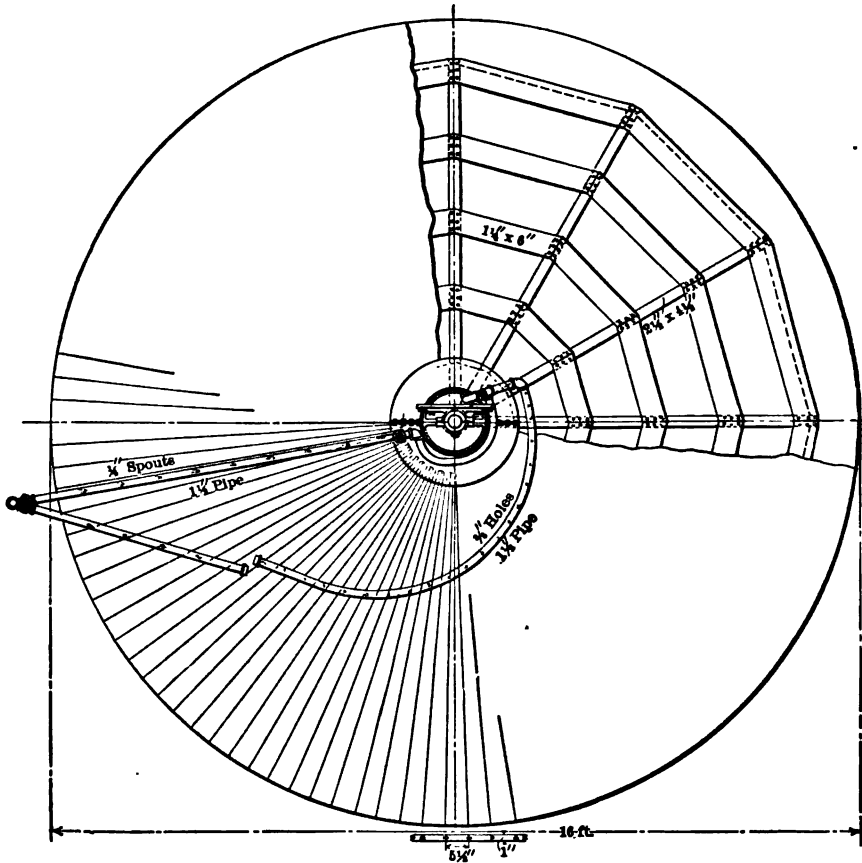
PLAN OF THREE-DECK SLIME TABLE.
